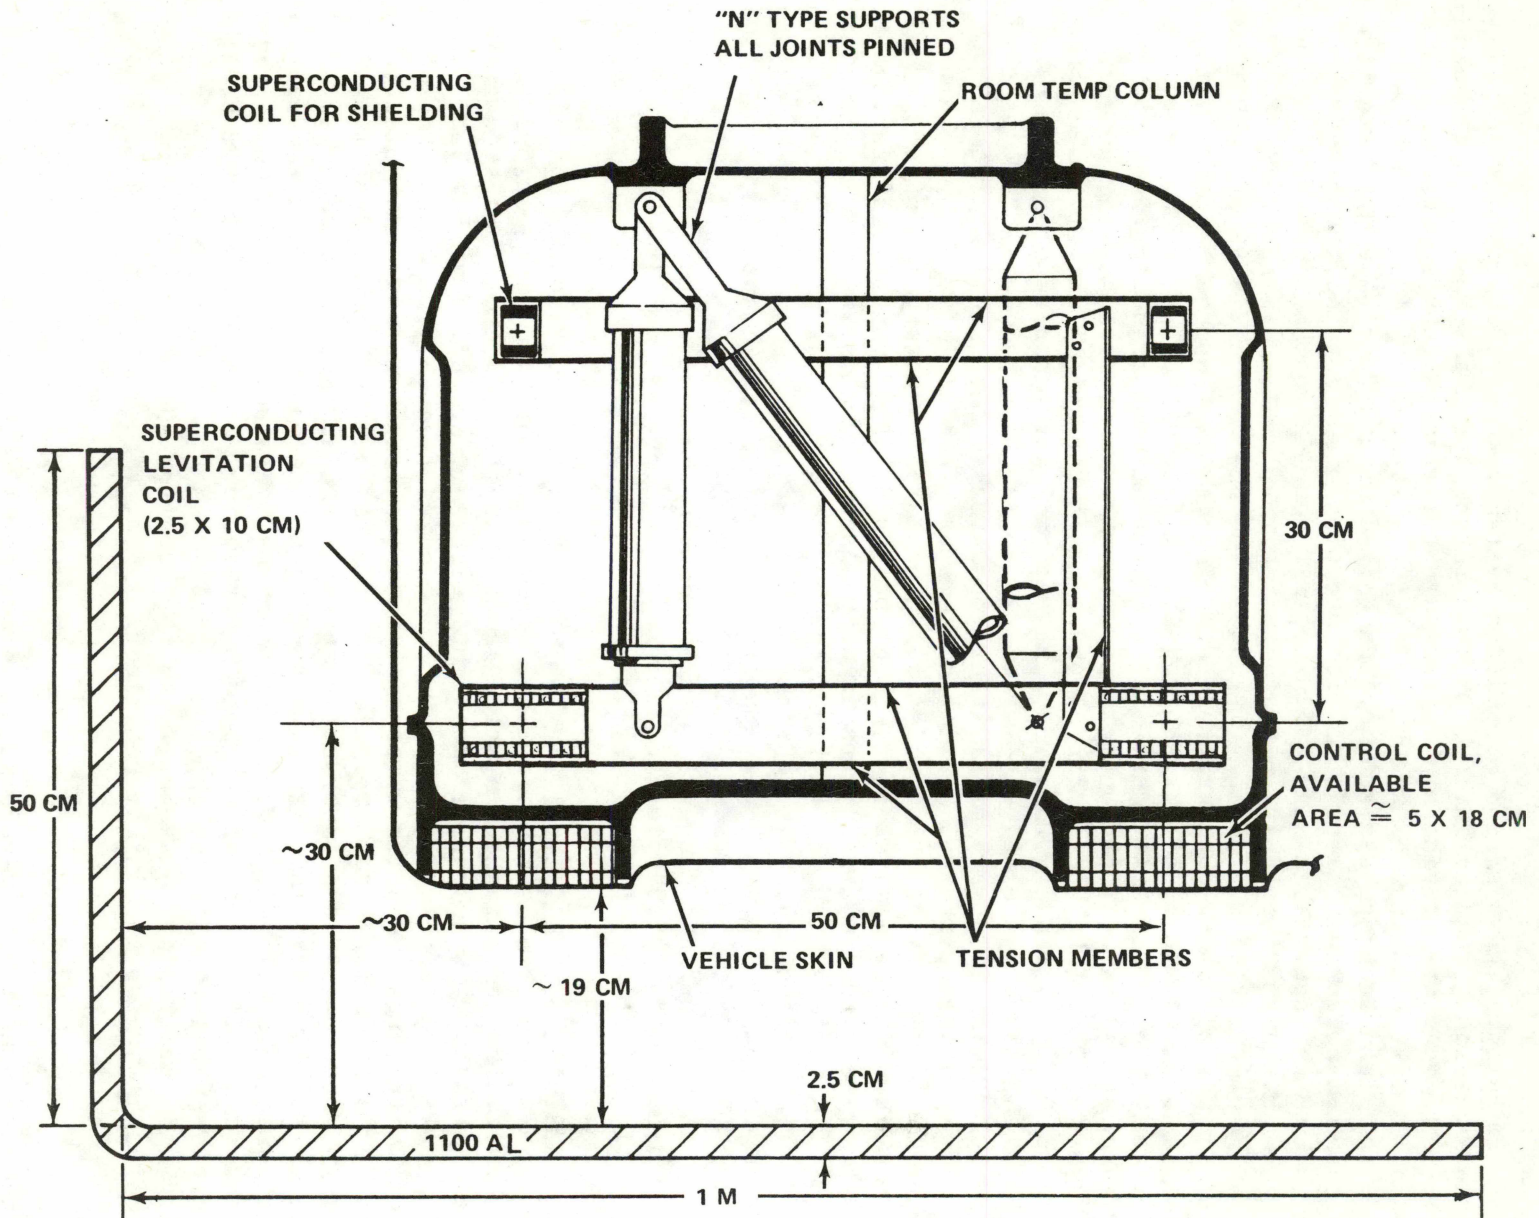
CROSS SECTION OF BASELINE MAGNET ASSEMBLY WITH SHIELDING COIL
